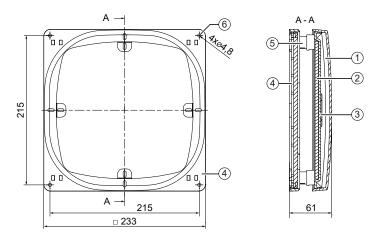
Dimensional drawing of Flair V-233x233 inner cover
